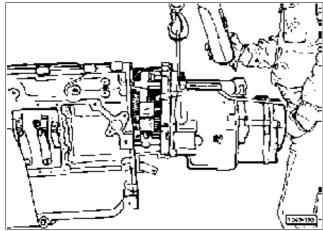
Install the Agroshift unit and gearshift assembly, complete, in the rear transmission housing. Apply Silastic 738 sealant to one of the mating surfaces before uniting (on machines without Agroshift, proceed with fitment as for standard gearshift only).
